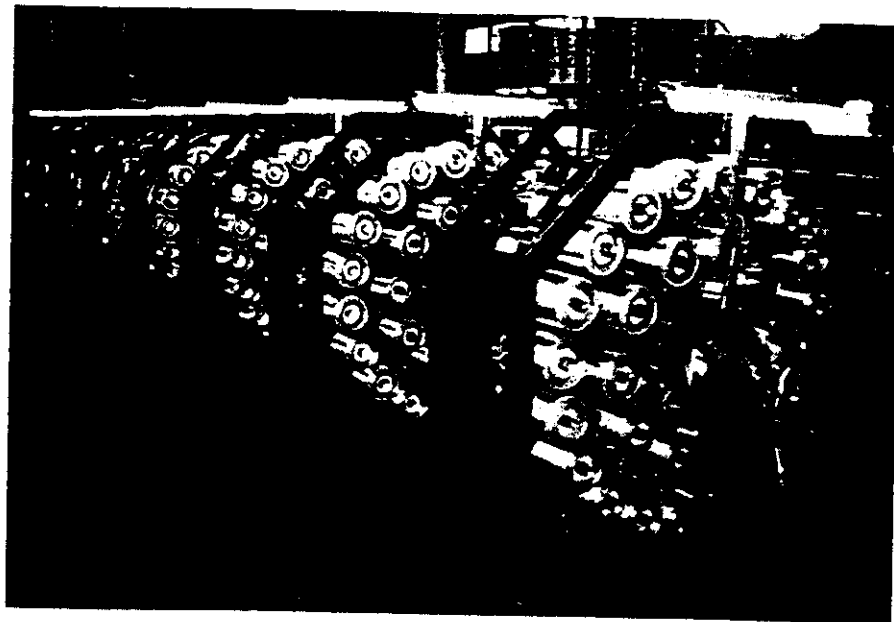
Ring winders in series used to fabricate spoolable composite pipe.
